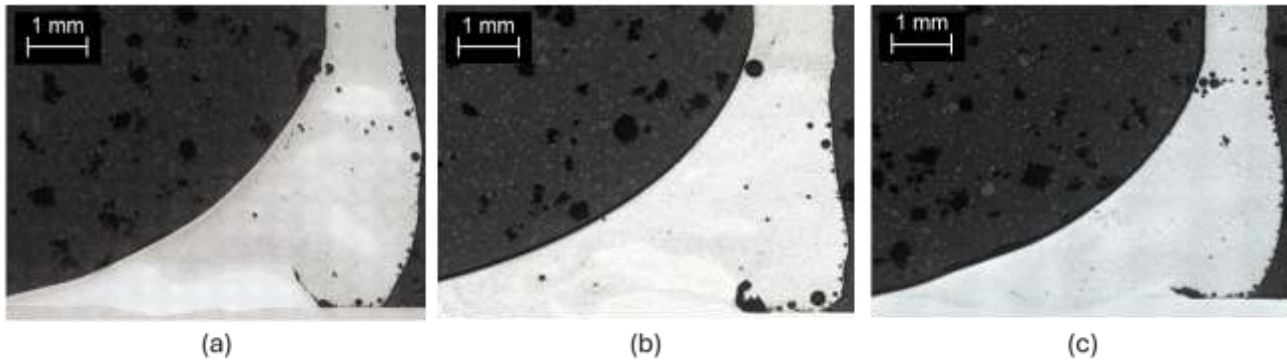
Cross-sections of heat-treated (HT) specimens welded with (a) continuous GTAW, (b) pulsed GTAW at 80 Hz and (c) 100 Hz.
